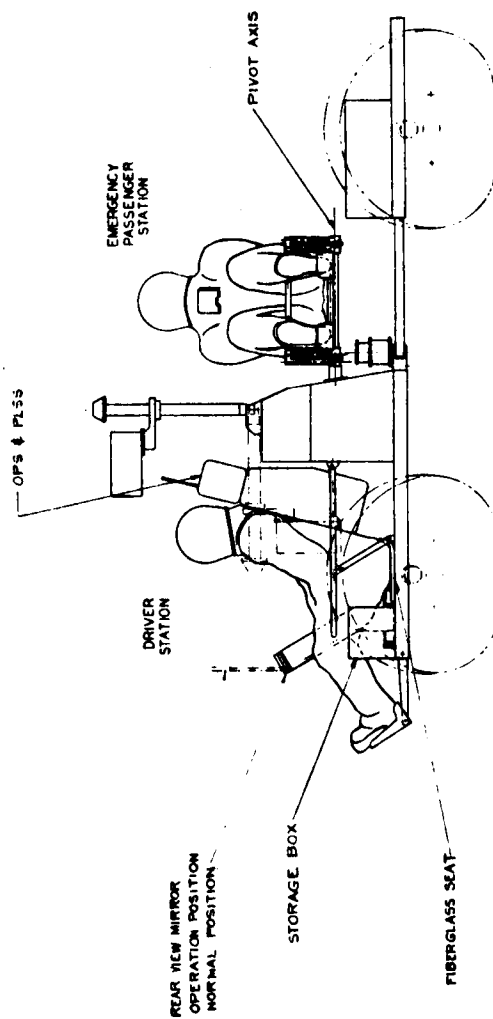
DLRV CREW STATION ARRANGEMENT
